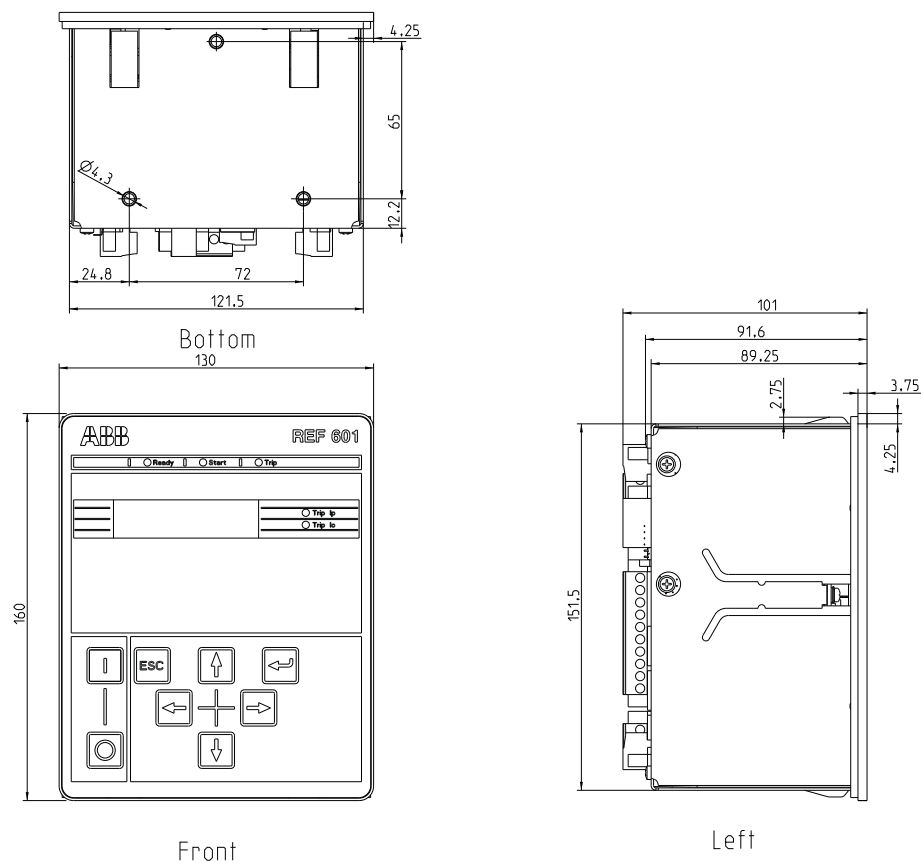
Relay mounting dimensions with Flush (Panel) mounting
